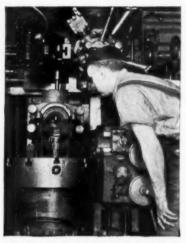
Here a 3/4 hp unit is grinding a steel extruding cylinder with three bearing extension quill mounted on a boring mill.
